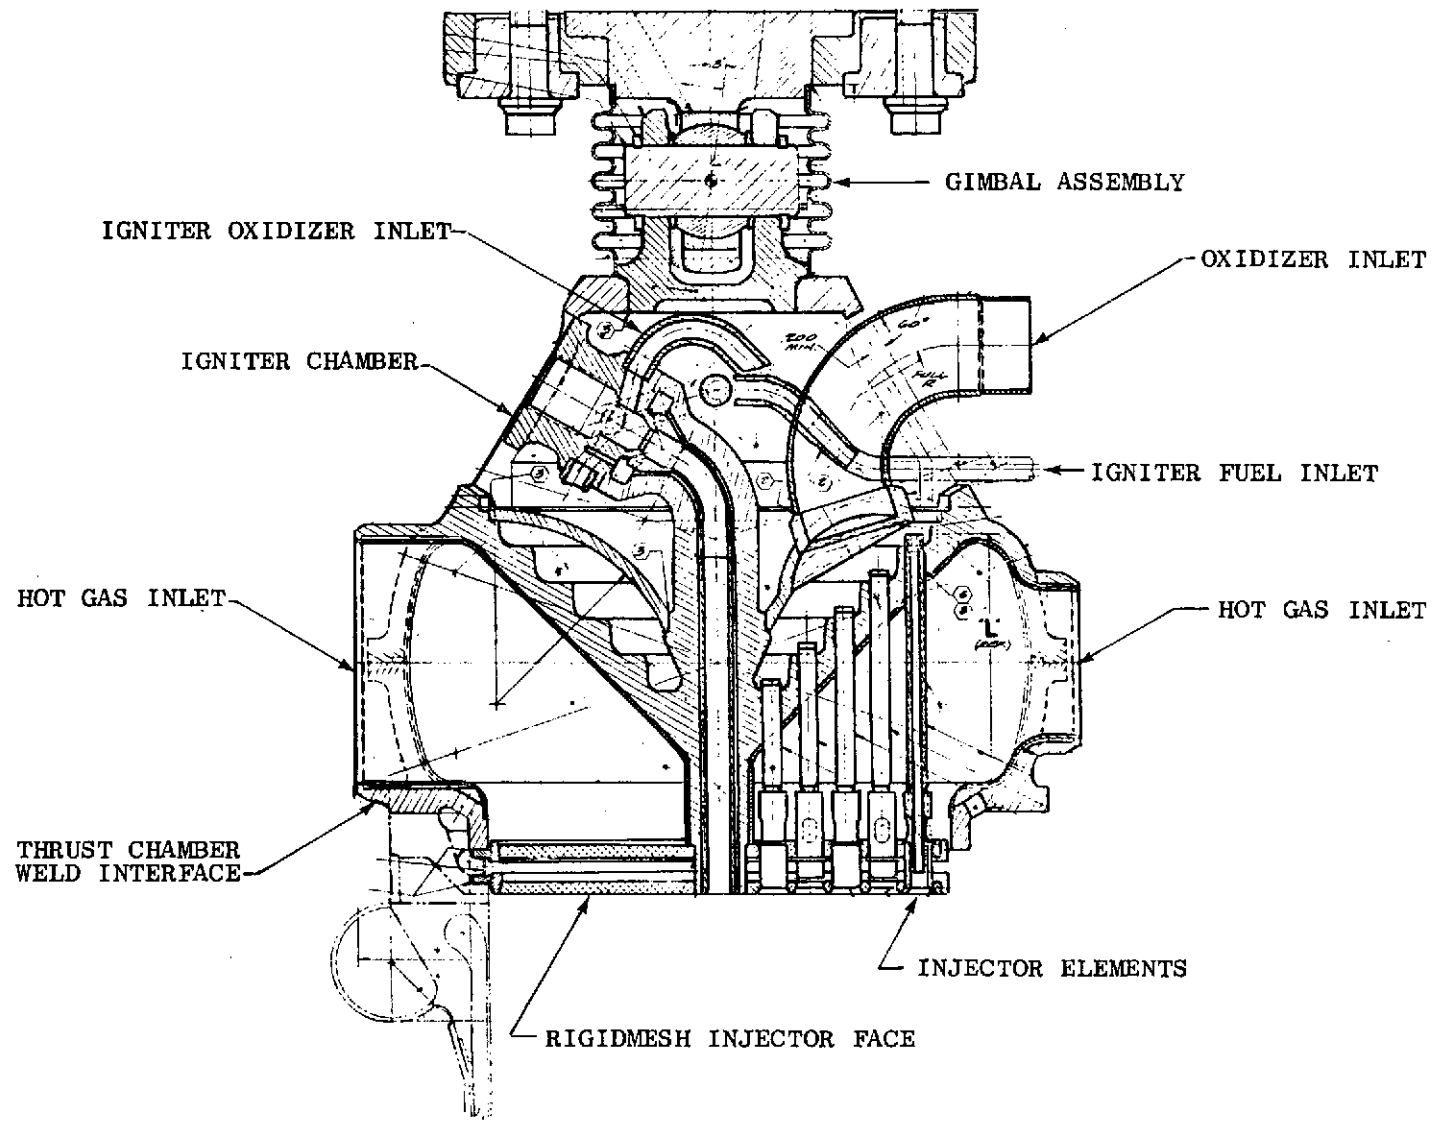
Thrust Chamber Injector and Gimbal Assembly
